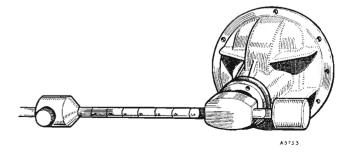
Checking the bevel pinion bearing preload (Service tool 18G 207)
